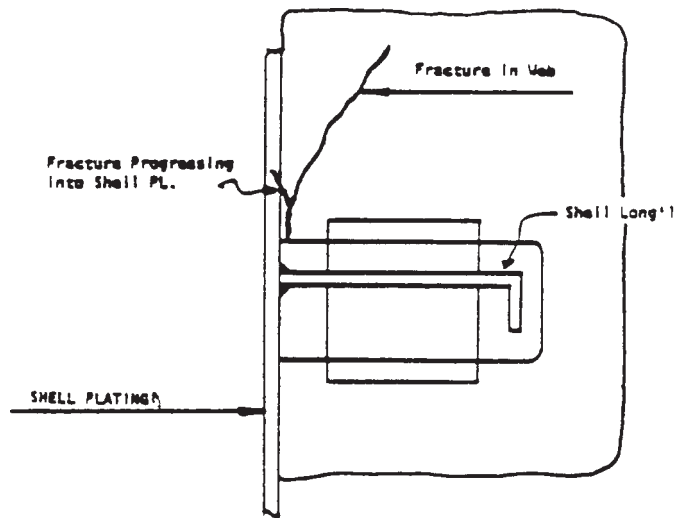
Combined Progressive Shell Plate and Transverse Web Frame Fracture
